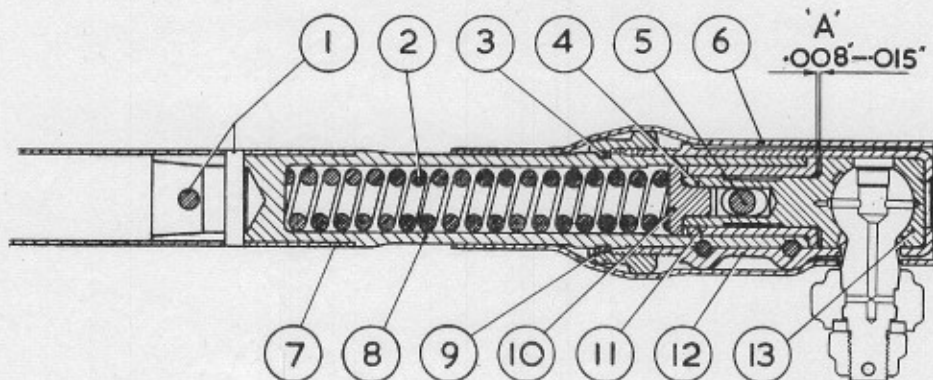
SECTION THROUGH CROSS STEERING TUBE JOINT.
